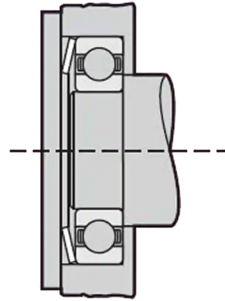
Ball bearing disc spring location [62] - *Courtesy of TFC.
